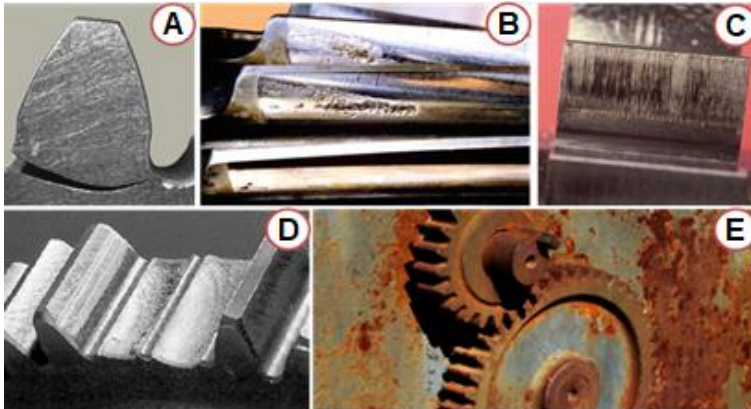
Examples of tooth damage: A – crack, B – pitting, C – chafing, D – tooth fracture, E – corrosion [3]
